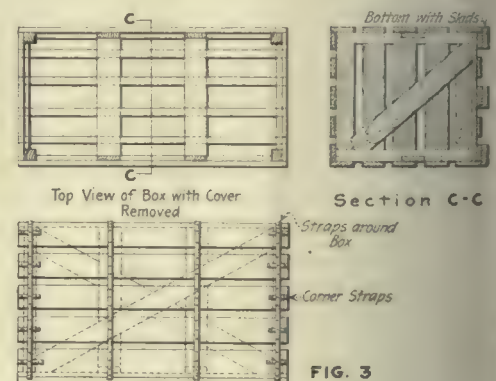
PACKAGE FOR HEAVY MACHINERY
